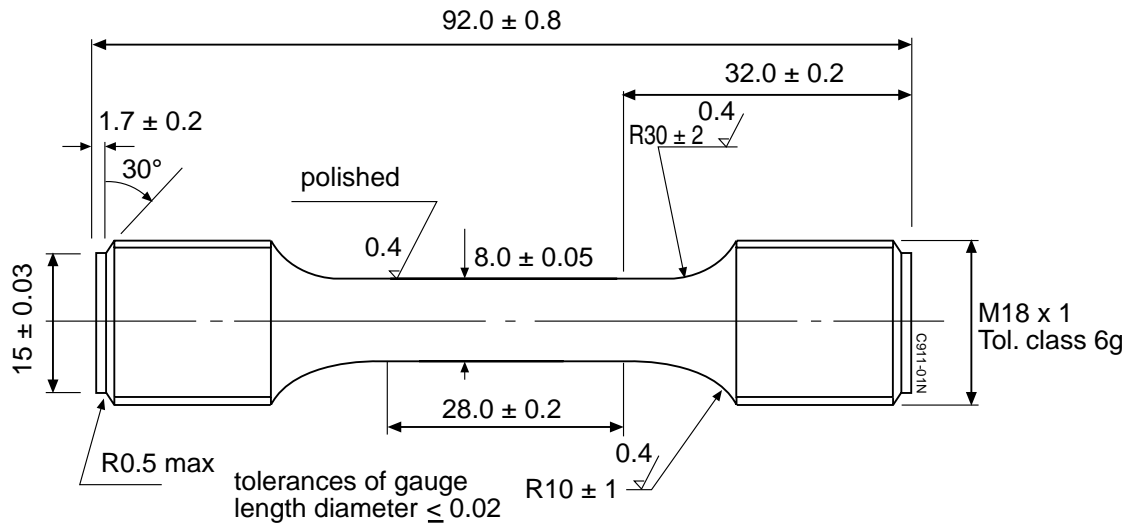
Low cycle fatigue (LCF) specimen configuration: dimensions in mm
